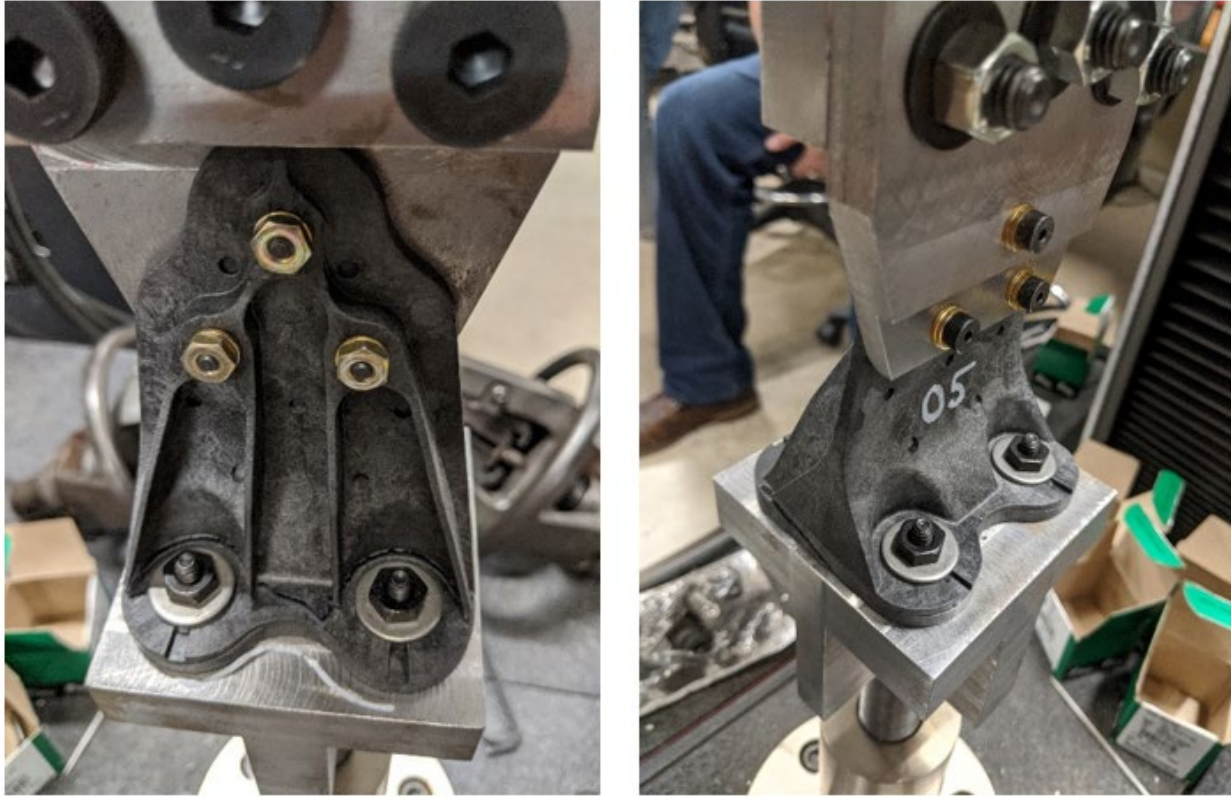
Sample Bracket Loaded in Custom Test Fixture
